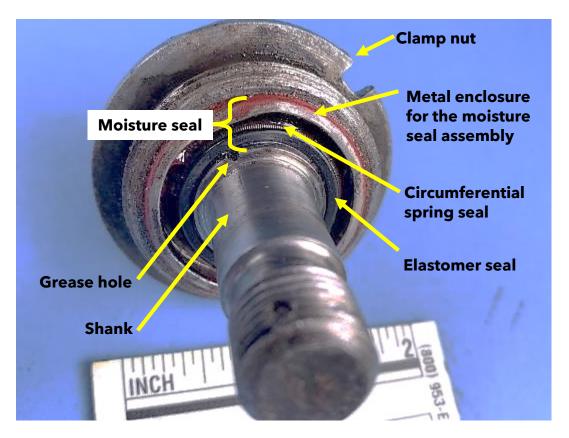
View looking up at the clamp nut showing the moisture seal assembly. It was installed between the inner diameter of the clamp nut and the larger diameter portion of the shank. It is composed of a circumferential metal enclosure, an elastomer seal and circumferential spring seal.
